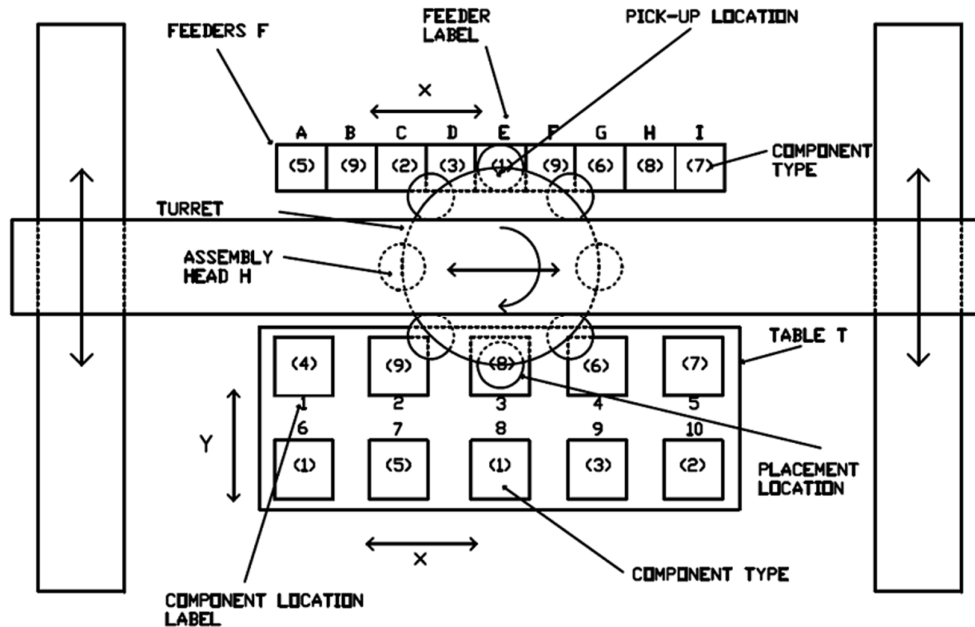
The assembly sequence of PCB with turret arrangement [5.1]
